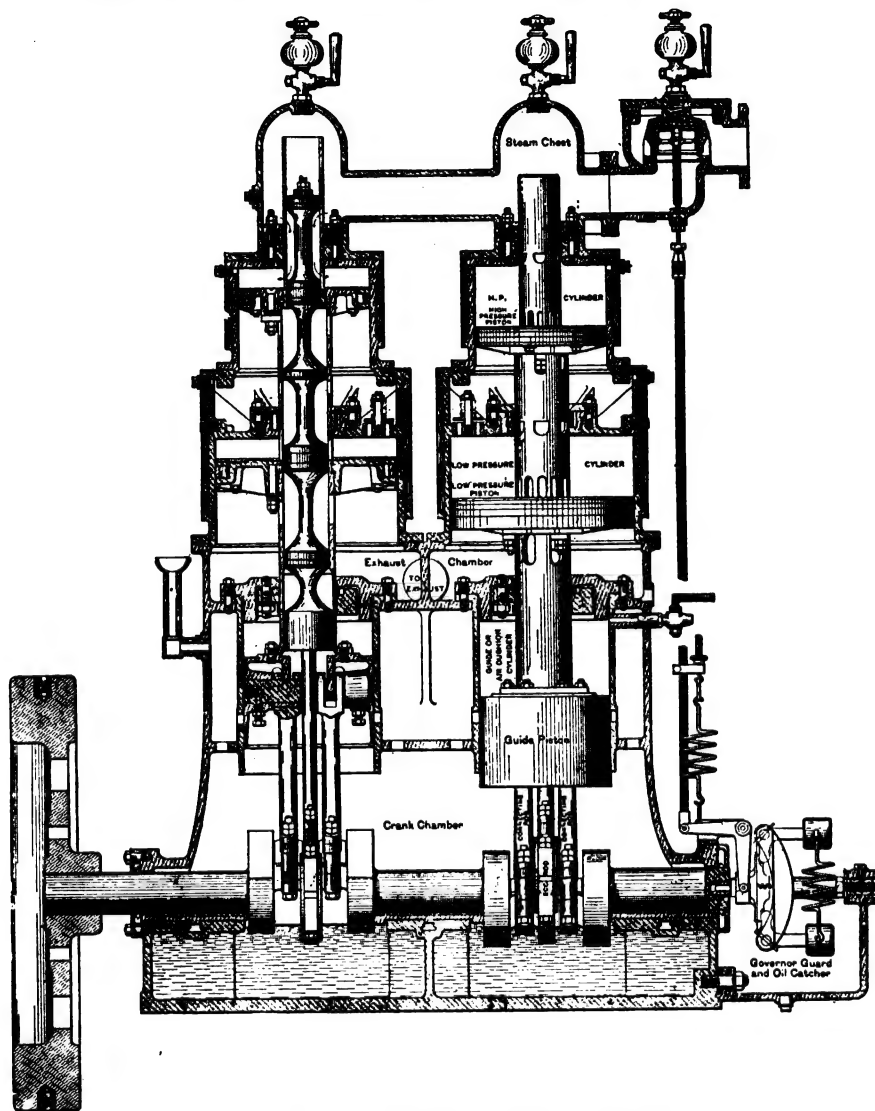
VALVES INSIDE OF PISTON ROD.
